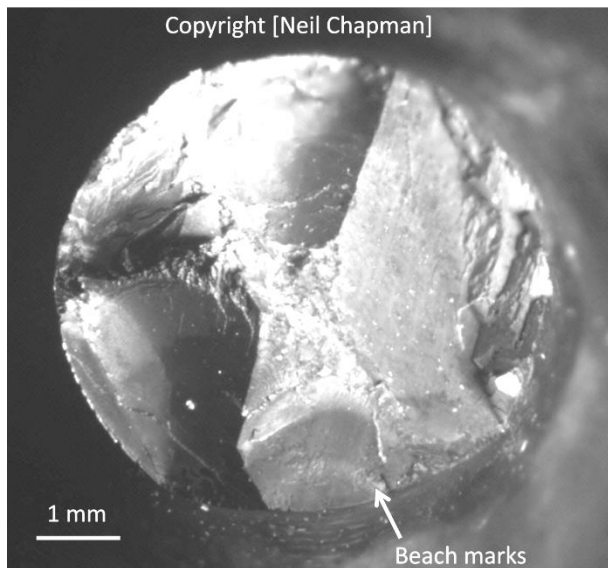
Low powered optical microscope image of beach marks observed on the initial flat perpendicular crack from the corrosion fatigue test using the 10-1-1-1 s waveform and non-precorroded test specimen
